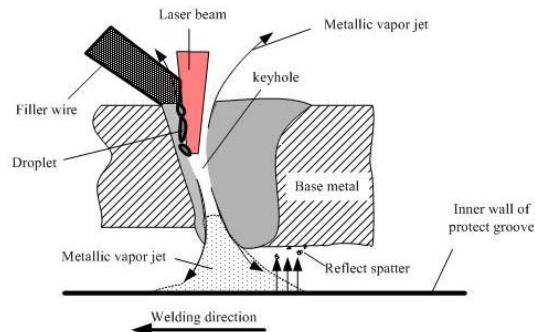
Gas cavity eliminations in laser butt welding 2 mm board with filler wire.
